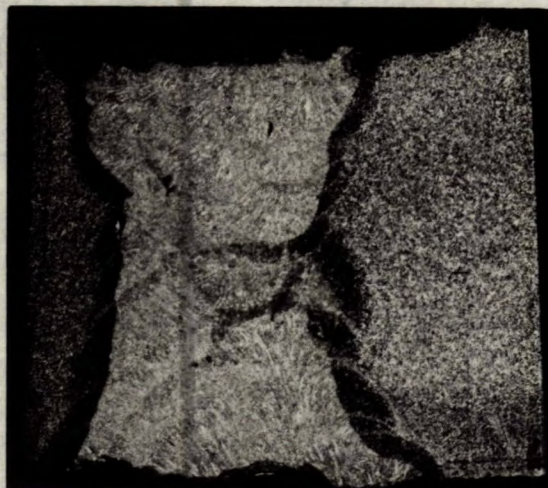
(b) - Section from a hull weld of the C.C.G.S. John A. McDonald. Sea water side is at the top. Interior weld has also been corroded, probably by sea water ballast. (Note that the original weld has been cut and the plate on the right hand side replaced). The plate is 40 mm thick.
